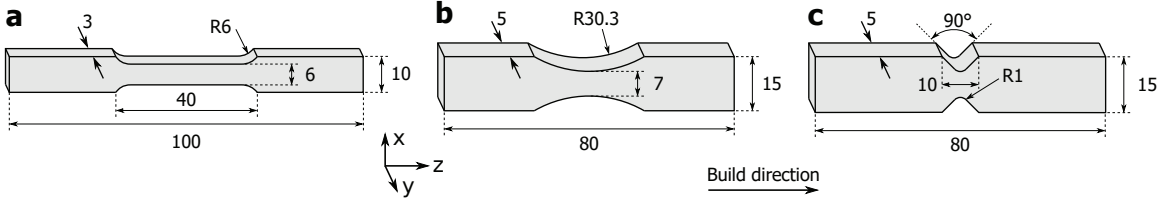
Dimensions of specimens: (a) tensile specimen, thickness 3 mm; (b) Unnotched fatigue specimen, thickness 5 mm; (c) Notched fatigue specimens, thickness 5 mm. All specimens are built in z-direction.
